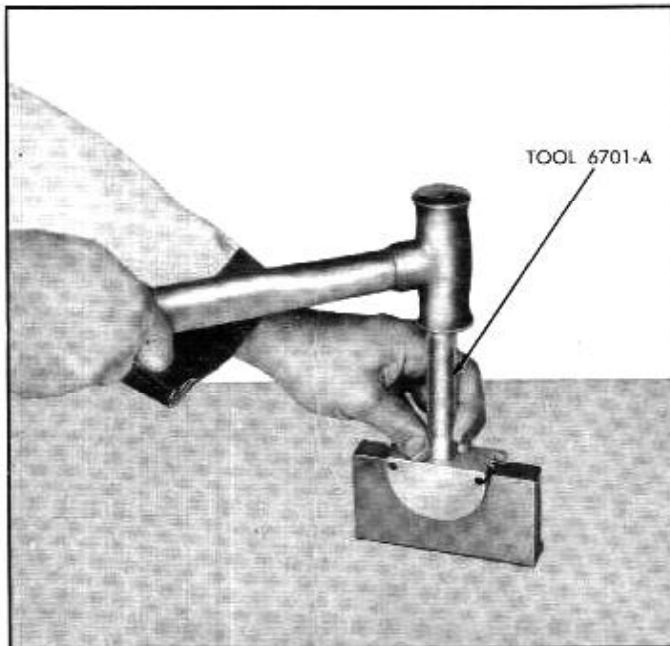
A-108—Installing Rear Crankshaft Oil Seal in Bearing Cap
